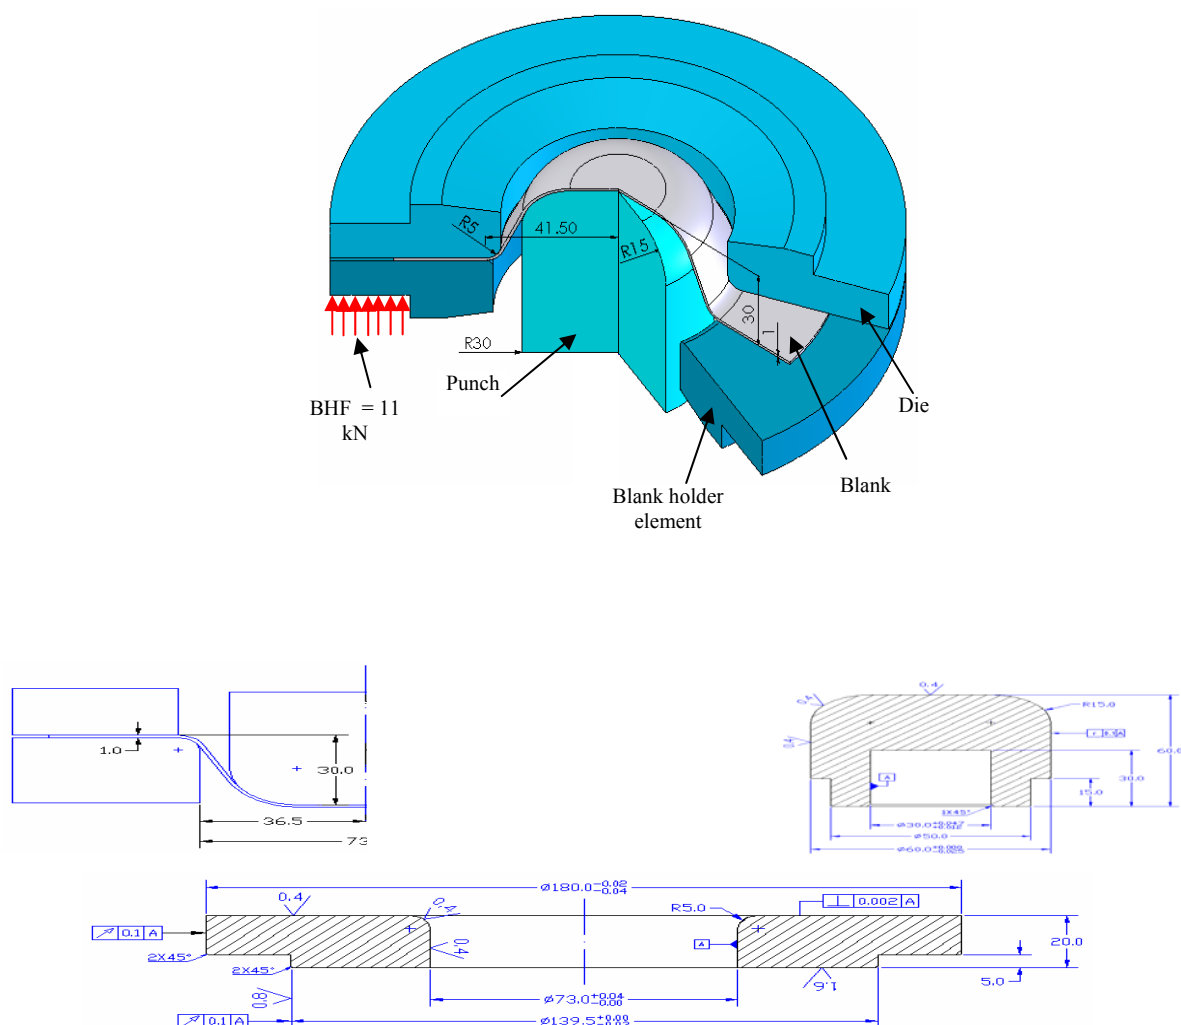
Geometry of tools and the parameters of the drawing process (optimized values)
